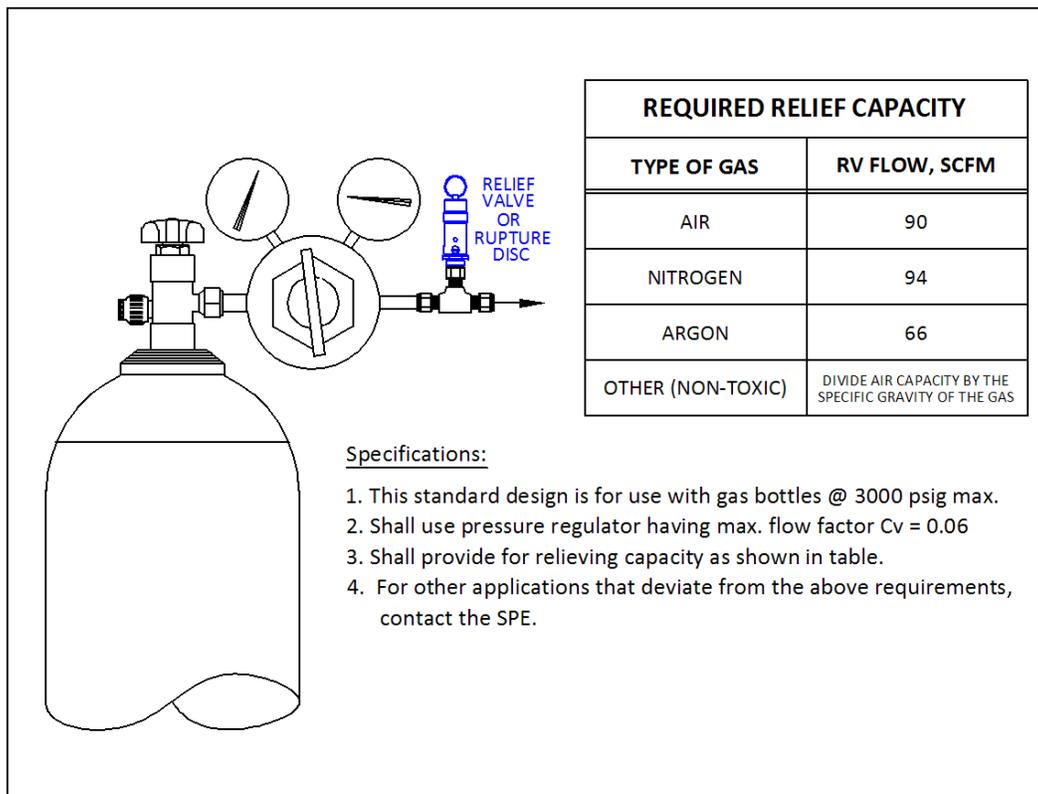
Basic design for connection of equipment to compressed gas bottles
